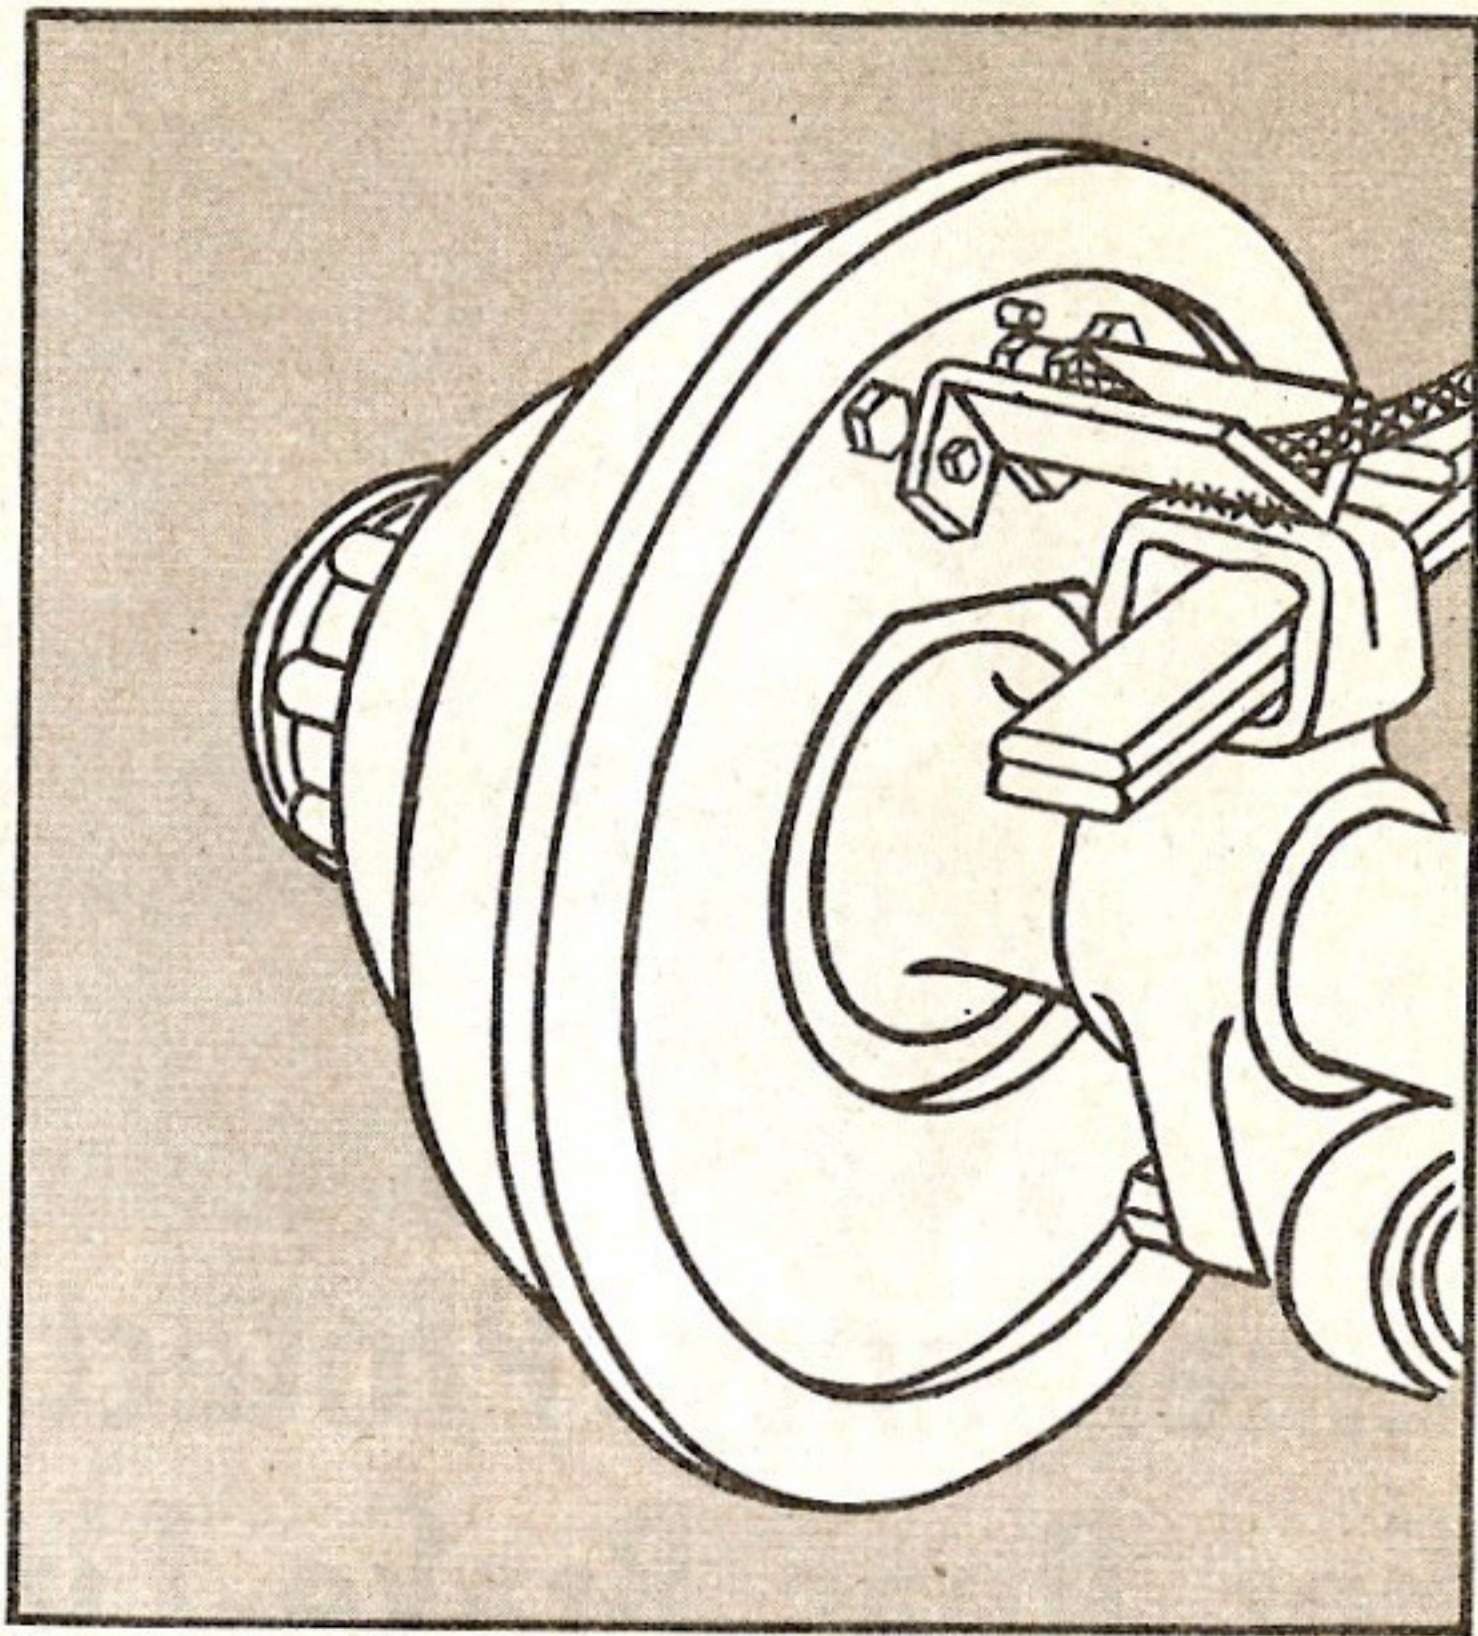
Bolt one end to the backing plate using the brake-cylinder mounting-bolts (size of the bolts should agree with the thickness of the angle iron), and weld the other end on top the spring guide-bracket. Now your brake line's well protected.
